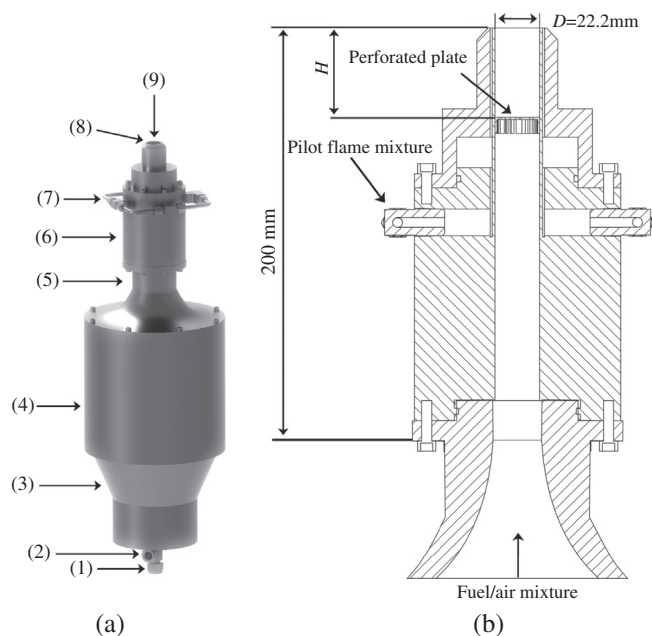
(a) A 3D view of the Bunsen-type burner assembly: (1) reactants inlet; (2) seeding particles inlet; (3) expansion section; (4) settling chamber; (5) contraction section; (6) main body of the burner; (7) pilot flame mixture tubes; (8) pilot flame annular ring; (9) exit of the burner, and (b) cross-section of the main body.
